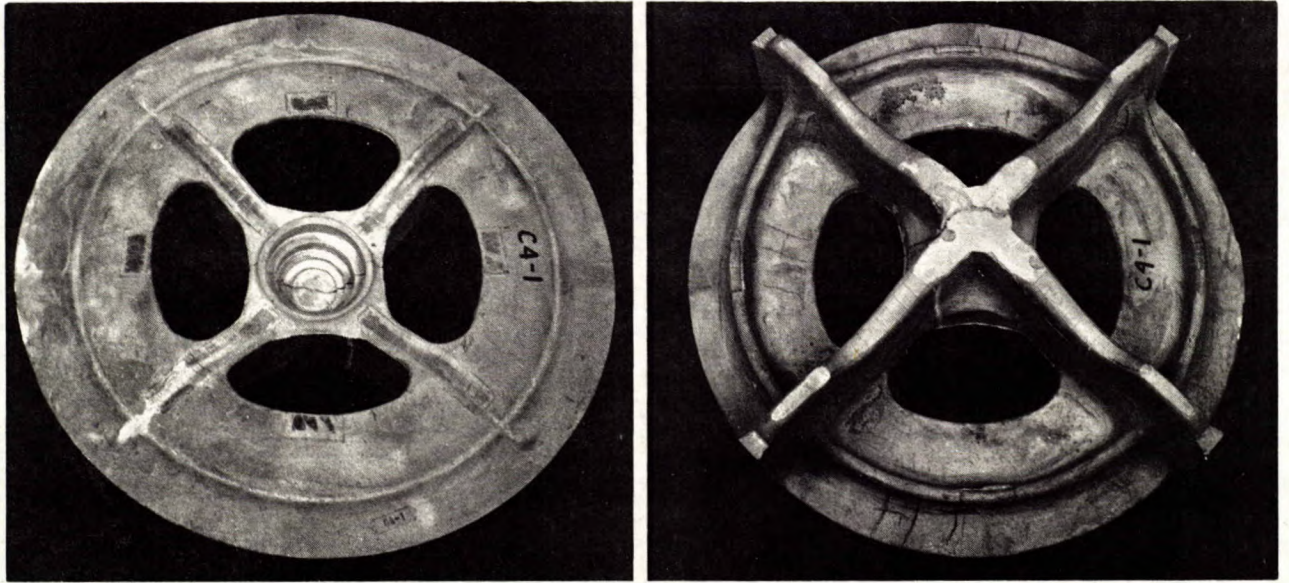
Typical fracture for all castings of C3 and C4 design in static load breakdown tests.
